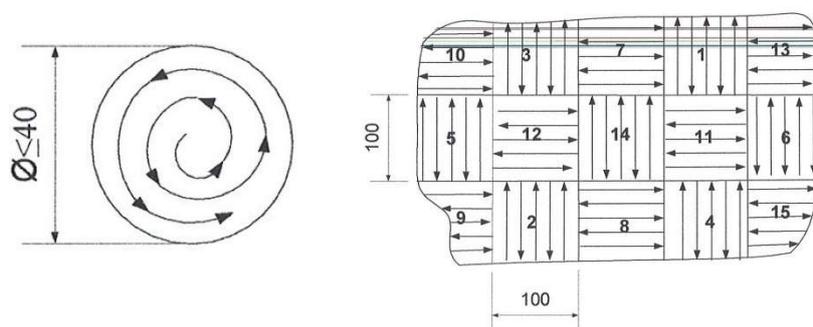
left) Welding procedure with spiral grinded surfaces $\varnothing < 40$ mm; right) welding procedure for grinded surfaces greater than 200 cm² (second layer)
